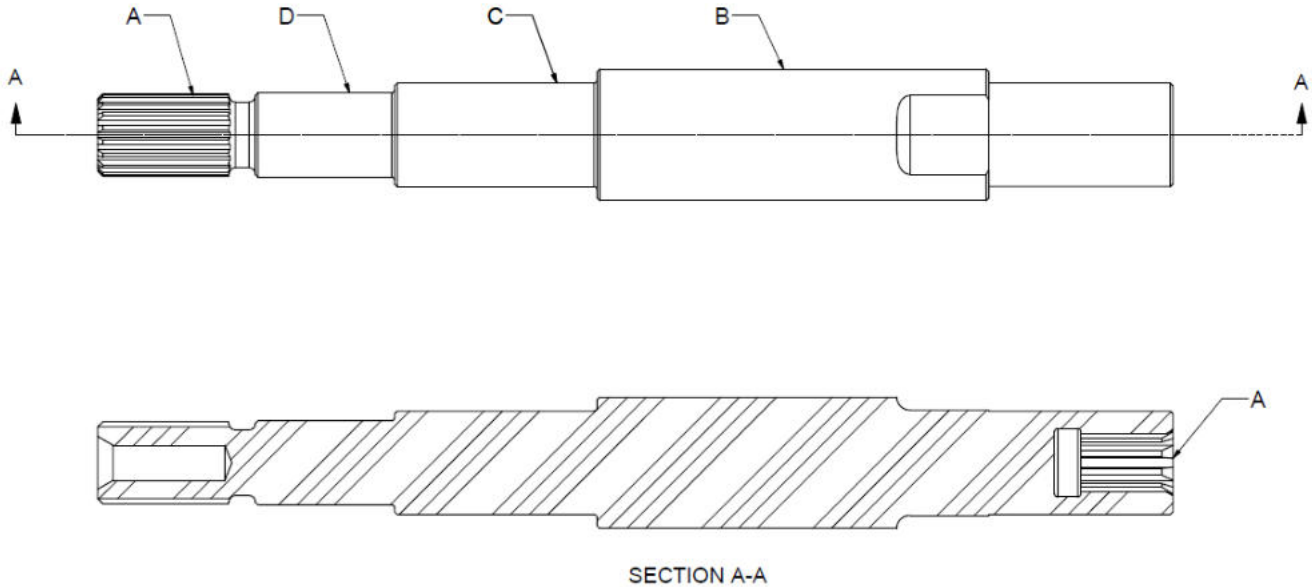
Impeller Drive Shaft Inspection Points/Areas
